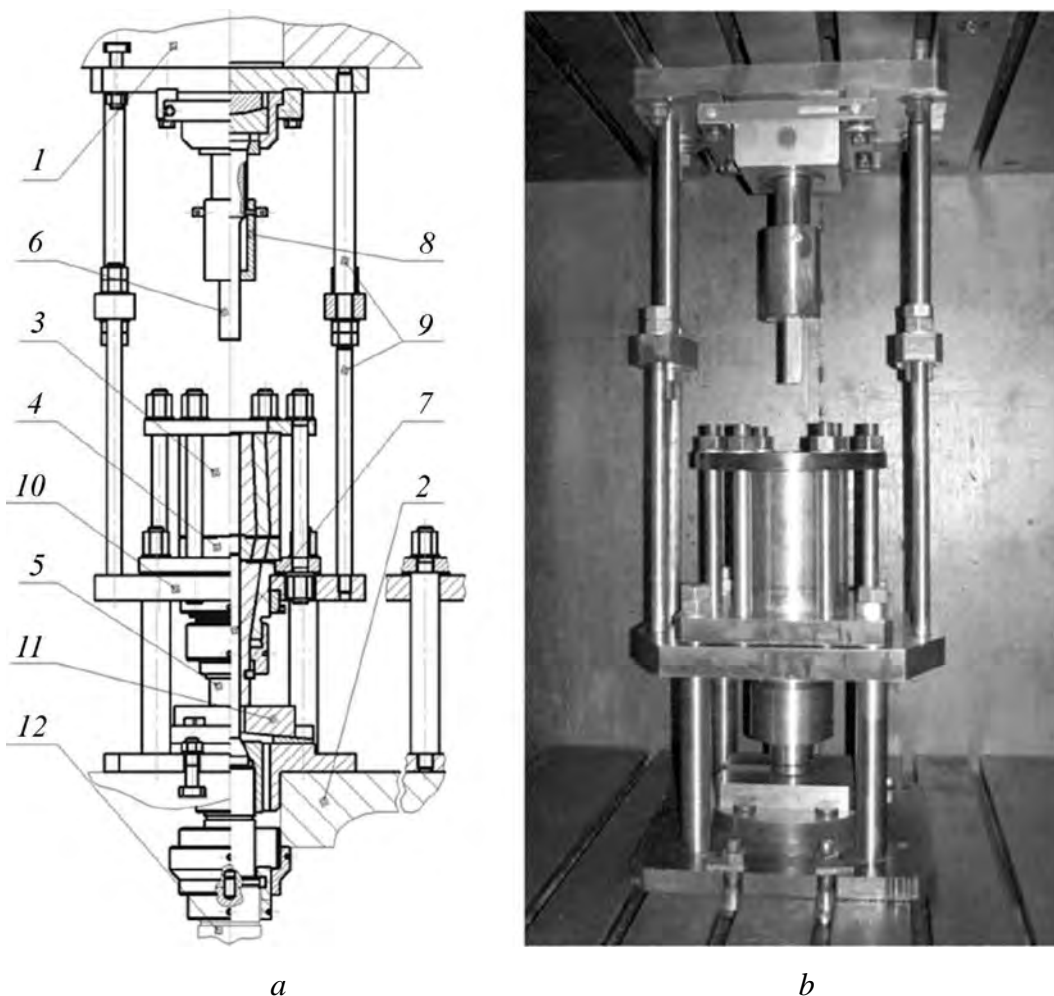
Industrial prototype of twist extrusion machine: *a* – the scheme of general assembly drawing, *b* – photograph of TE tool set
